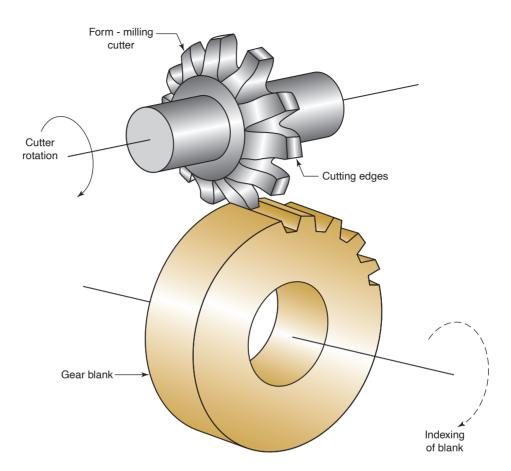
Form milling of gear teeth on a starting blank.
